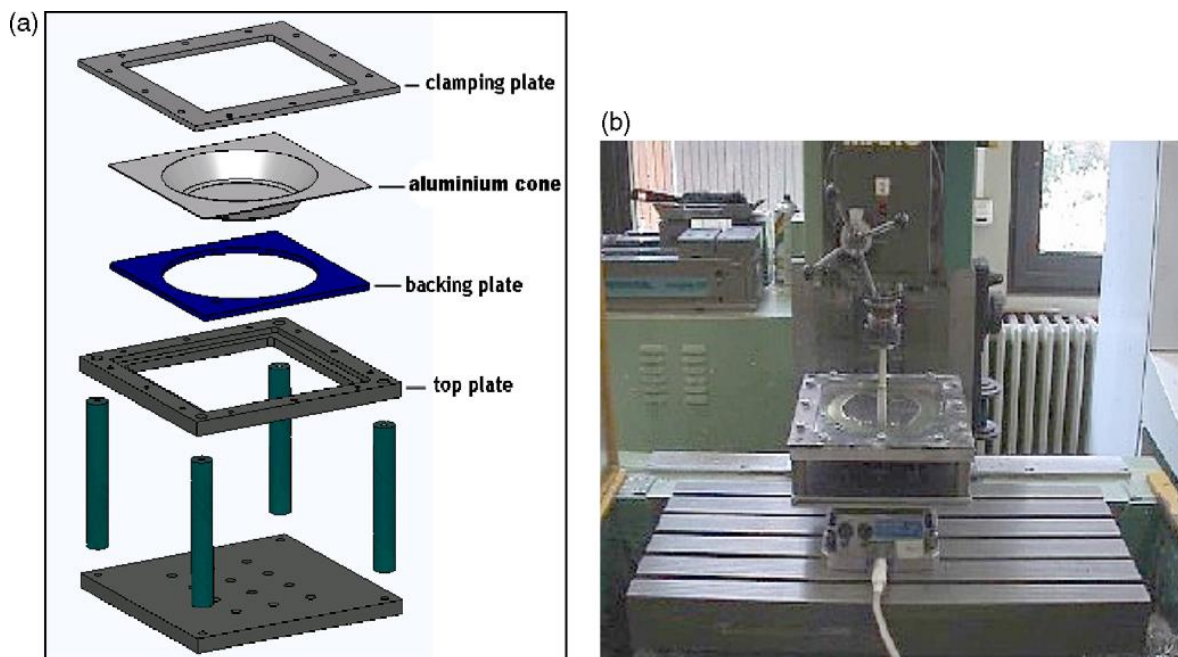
The experiment setup: (a) exploded view of forming fixture with formed cone; (b) the forming fixture with the force sensor mounted on the machine table [94]
